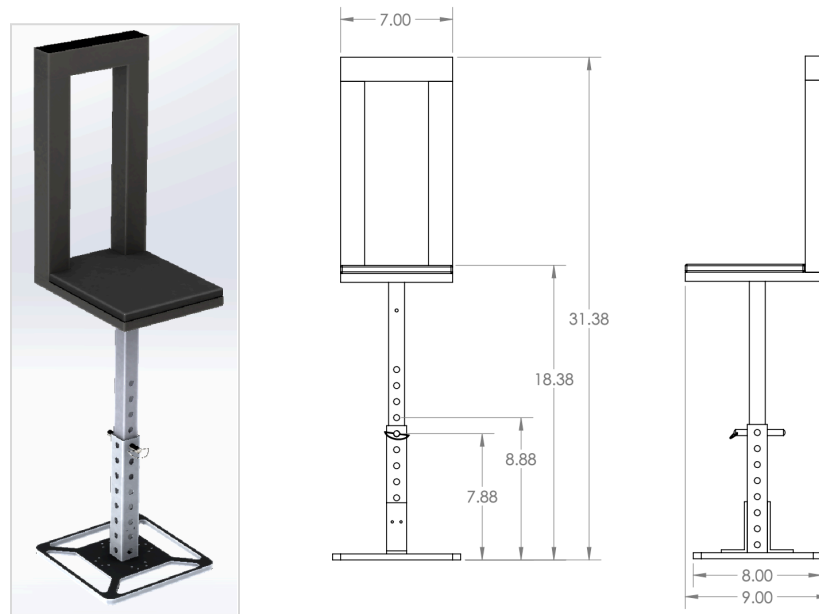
Stair assist bench (SAB) diagram and CAD measurements.
